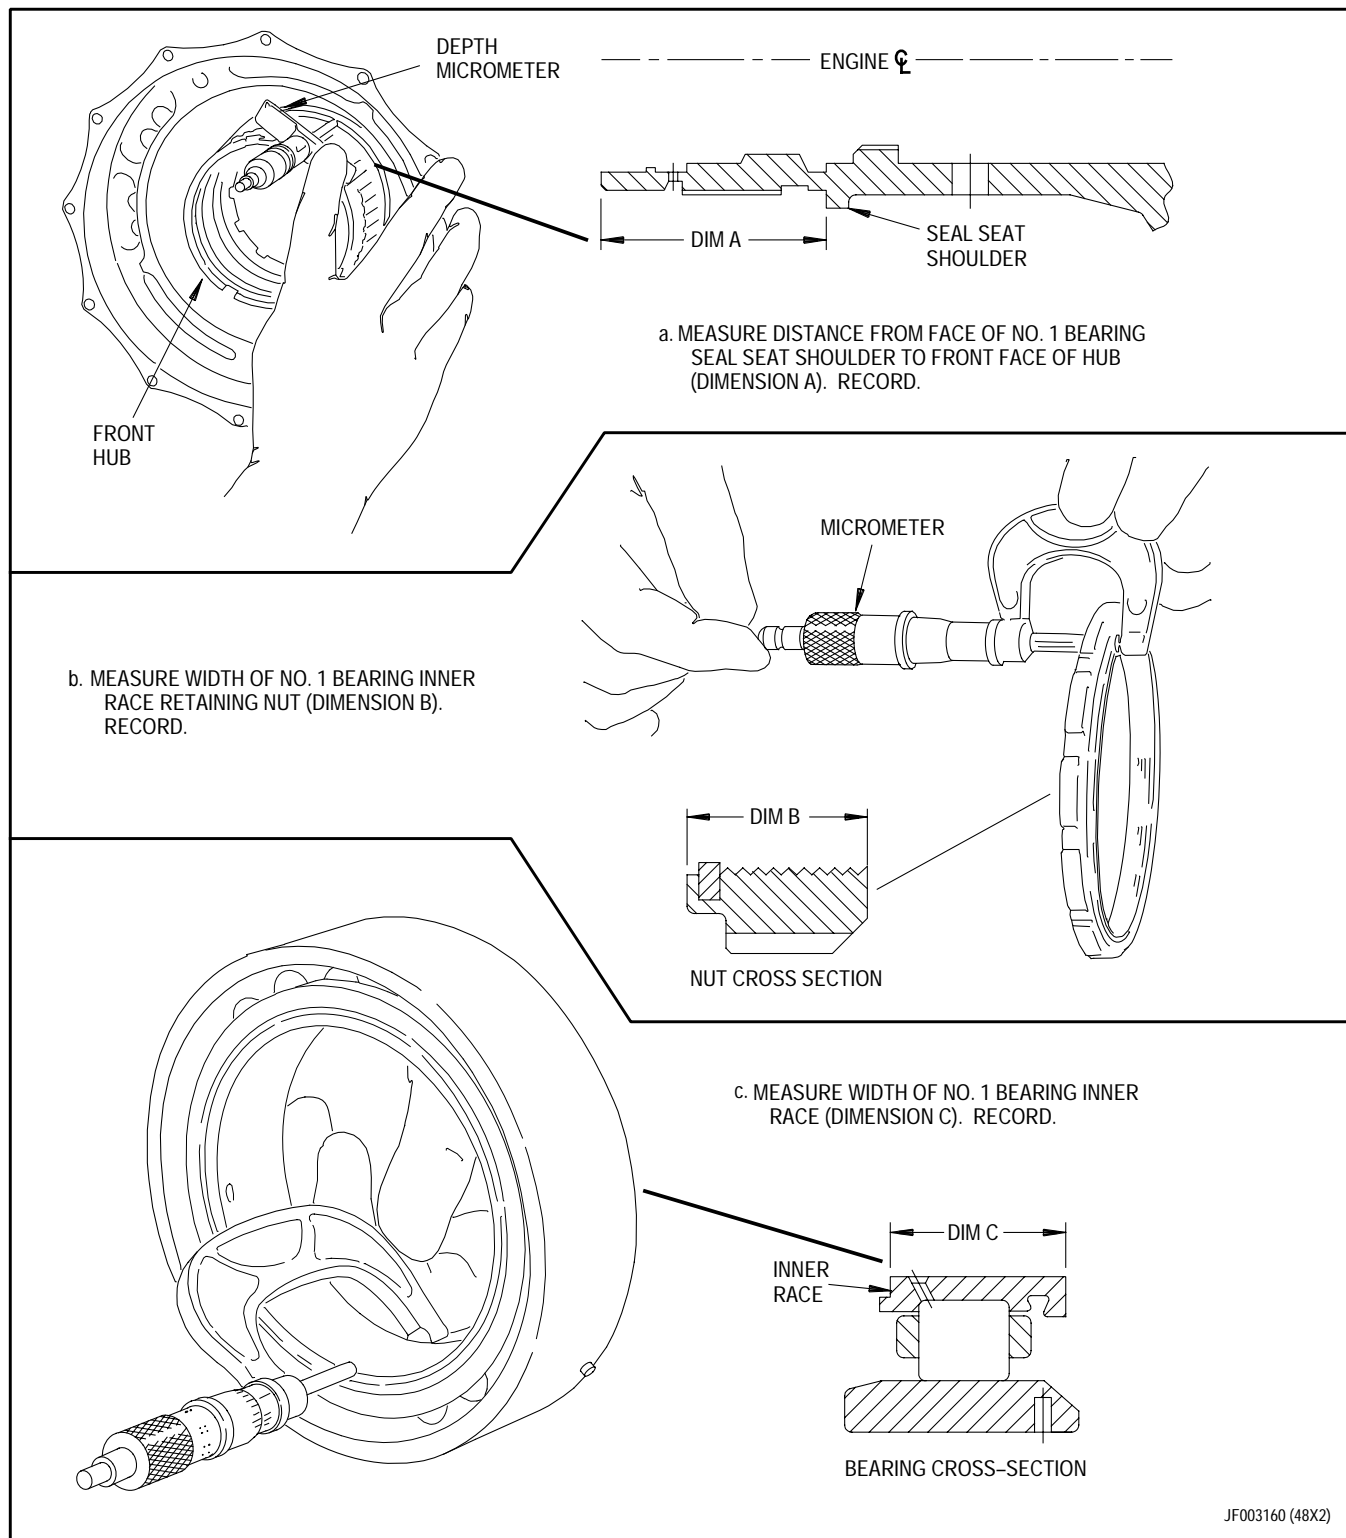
No. 1 Bearing Position Measurement Check - Summary of Operations (Sheet 1 of 2)
